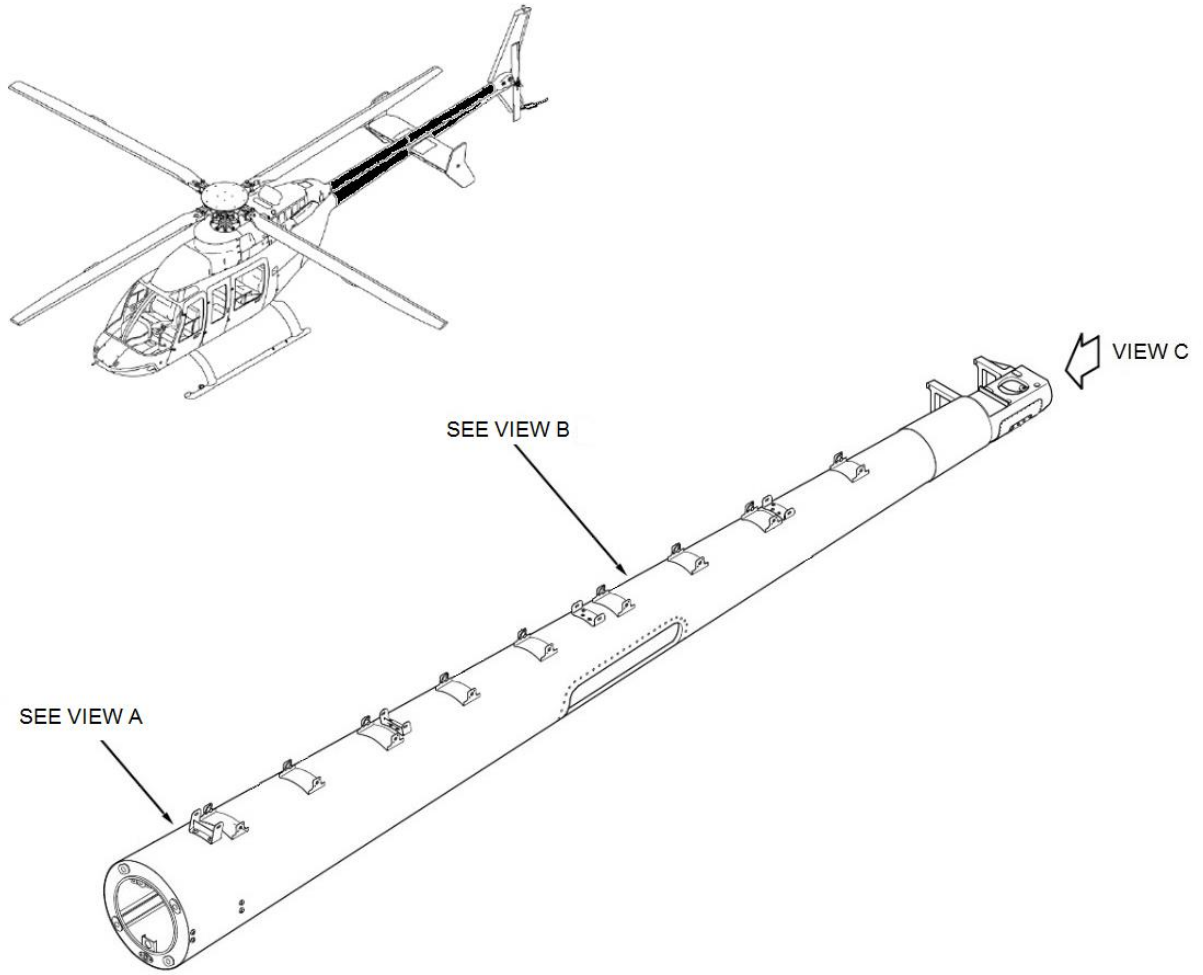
Tailboom Assembly (Sheet 1 of 4)
